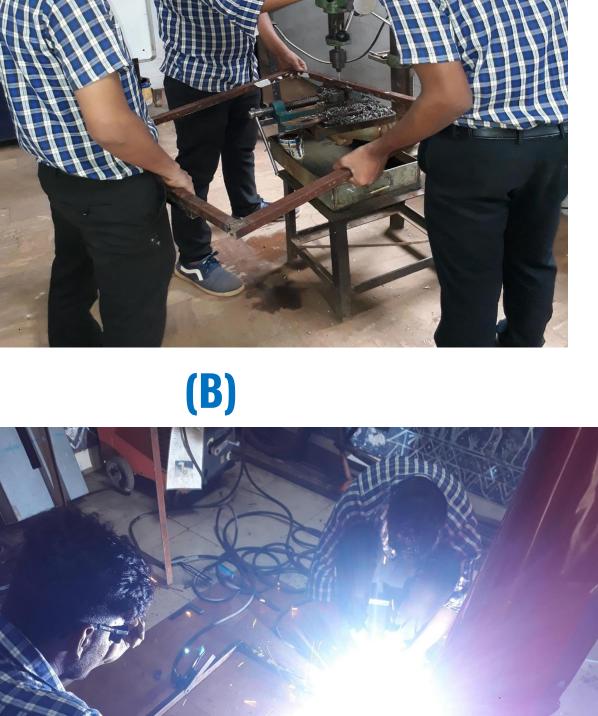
Doing project work with the teammates drilling, welding, cutting
